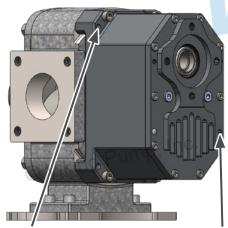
GEARBOX AND ENDPLATE JACKING POINTS
